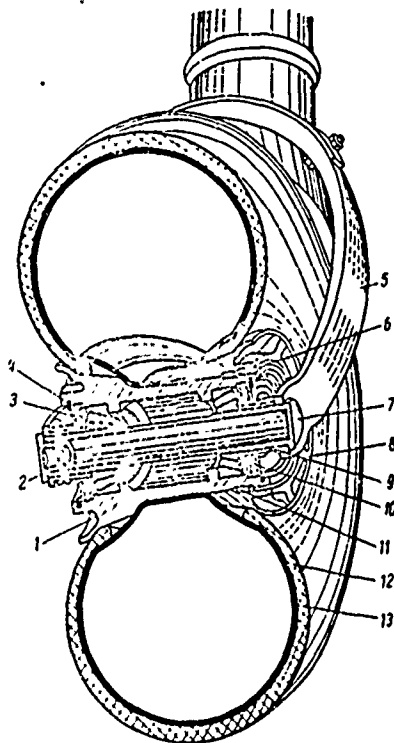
Tail wheel: 1 - wheel drum; 2 - wheel axle nut; 3 - ring; 4 - split locking half-ring; 5 - wheel fork; 6 - locking half-ring; 7 - wheel axle; 8 - removable flange; 9 - spacer; 10 - roller bearing; 11 - lock pin; 12 - tire casing; 13 - inner tube.
